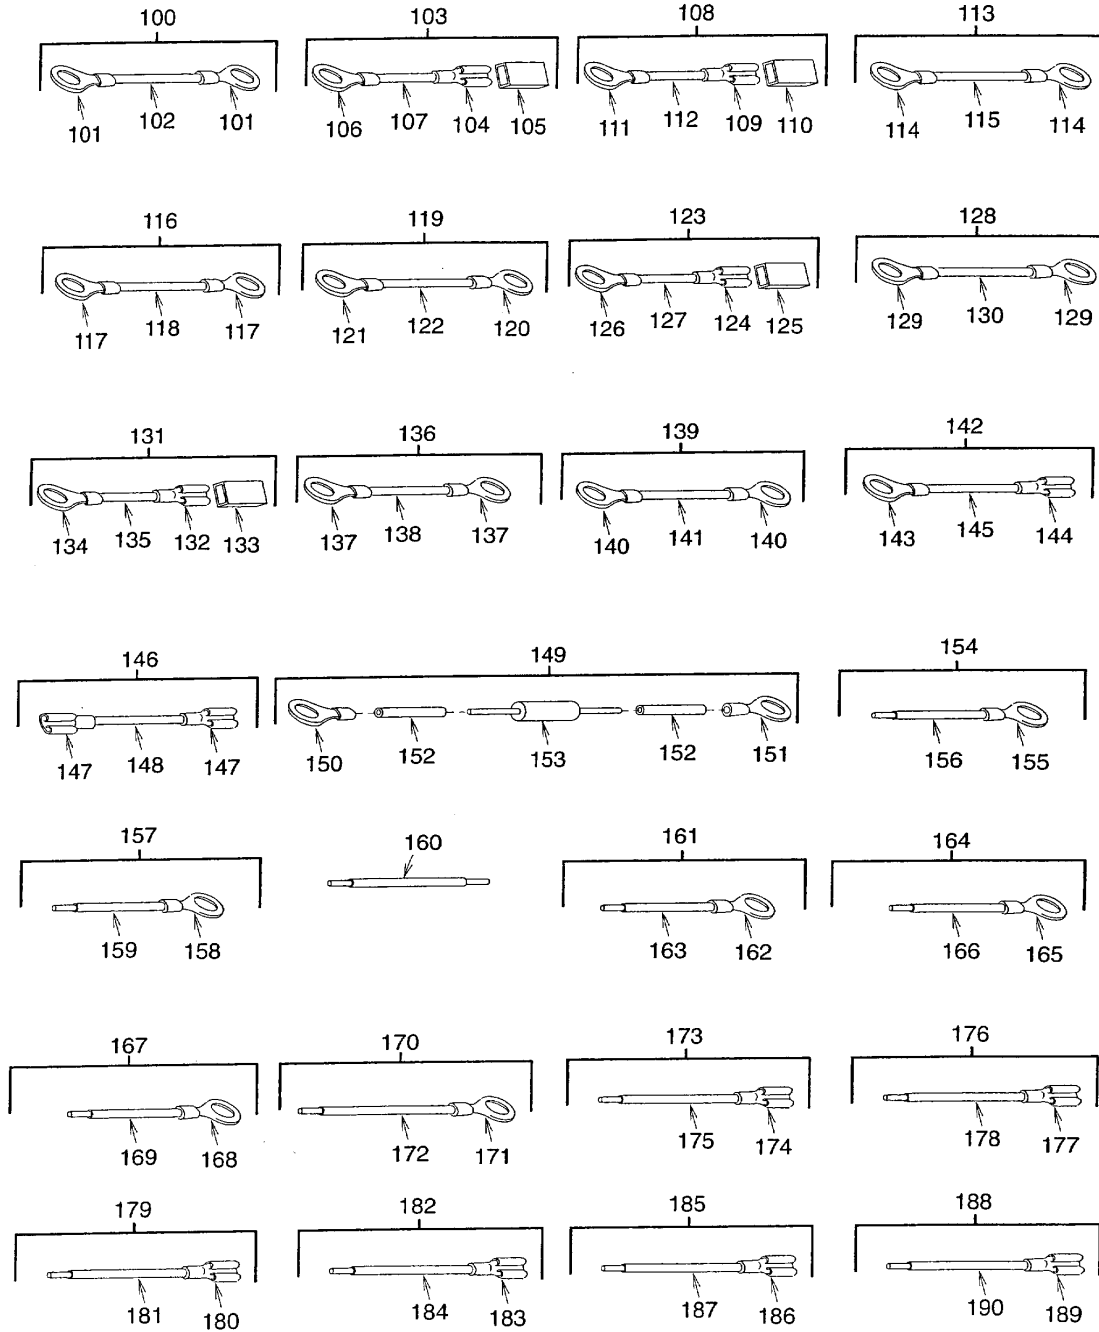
Control Box Wires and Cables (Sheet 2 of 3)
